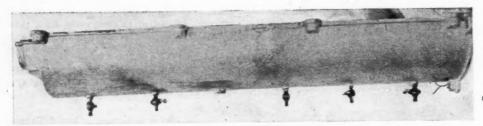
The aluminum oil pan shown above had a large piece broken out of its side. Such a casting should be laid over a small charcoal fire so that the full section, about the length of the break, will be uniformly heated, the broken piece included, since it should be heated along with the rest of the casting. When the metal has reached the proper temperature the welding should proceed. The piece should first be tacked in place or should be held in place with the assistance of a welding rod which has been fused to the piece
